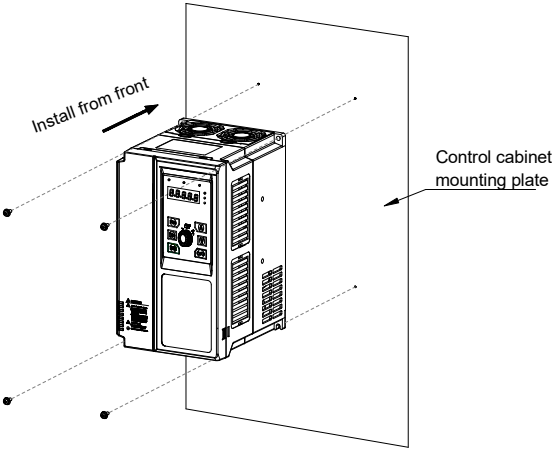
Wall-mounted Installation Diagram of Plastic Structure
